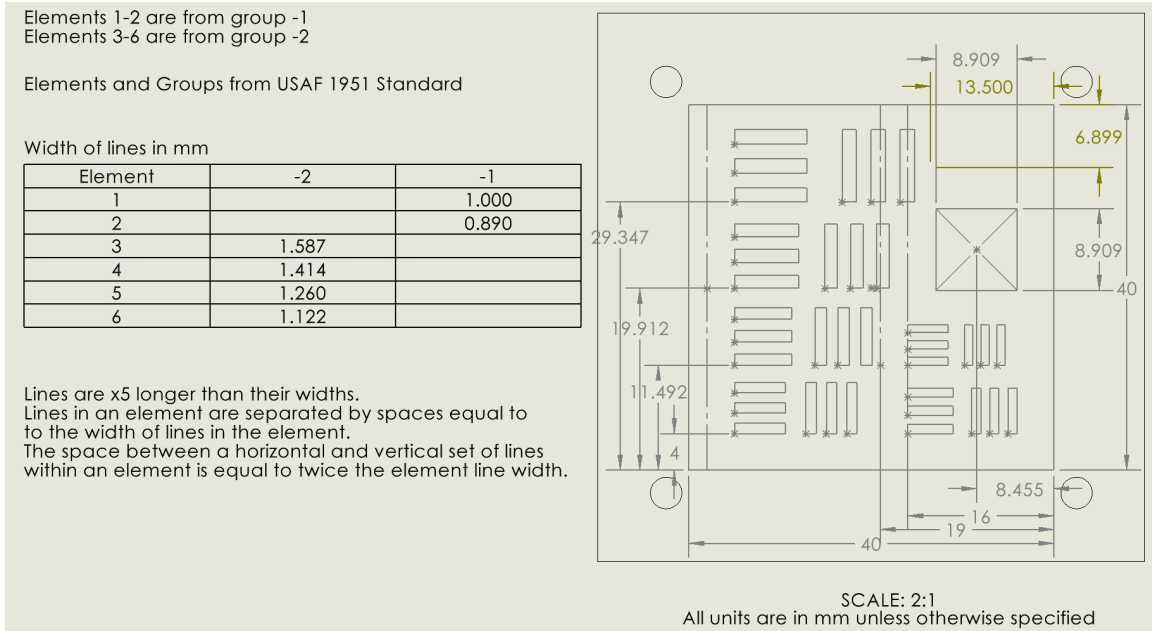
Technical drawing of the USAF 1951 derived resolution standard produced with the shielding paint [60].
